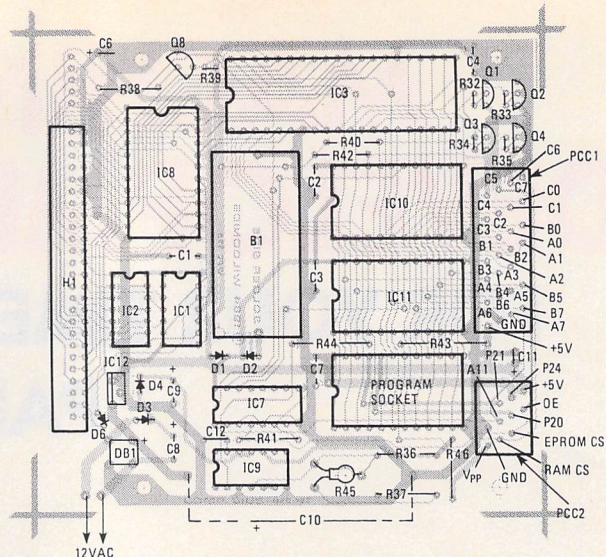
PARTS PLACEMENT ON THE MAIN BOARD is shown in this diagram. Take care to observe the proper polarities for all components.
